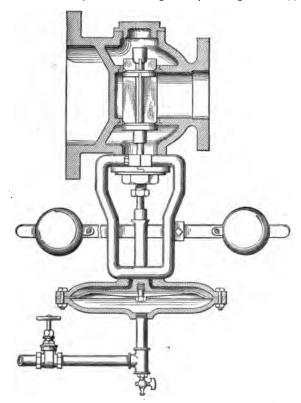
Pressure-Reducing Valve Monash Class C-1.
